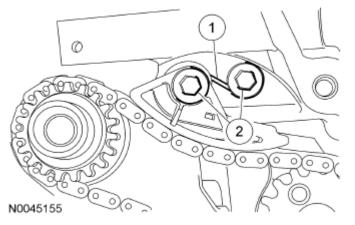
Identifying Oil Pump Chain Drive Tensioner And Shoulder Bolts Courtesy of FORD MOTOR CO.
